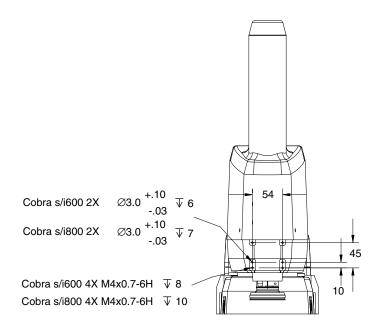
Dimensions of the Camera Bracket Mounting Pattern
